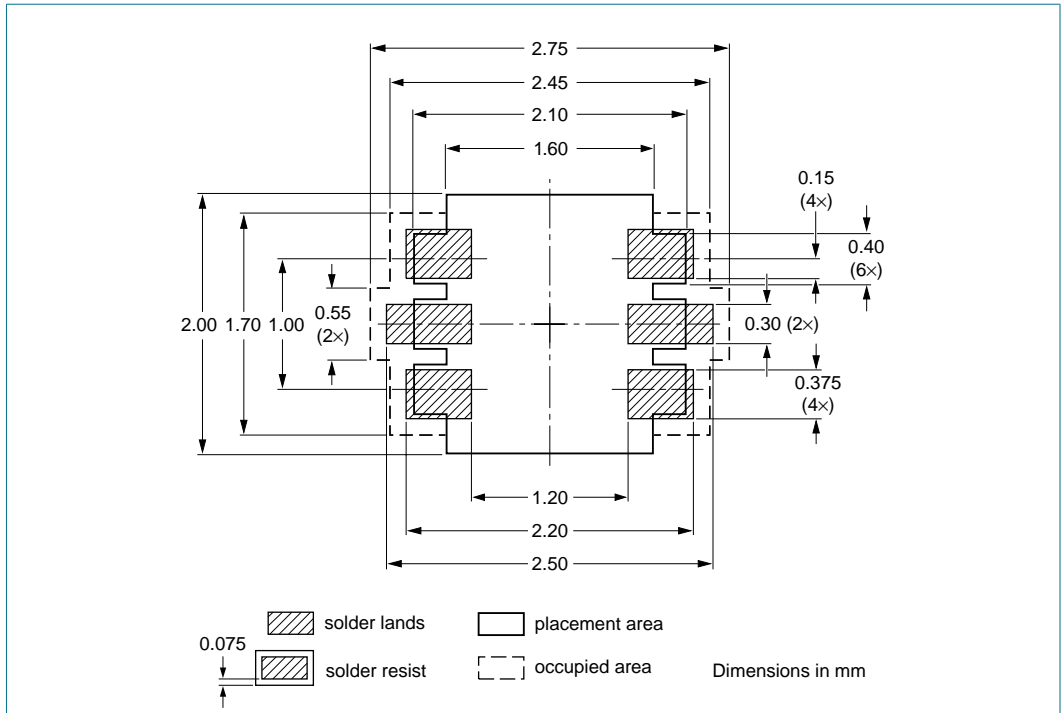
Reflow soldering footprint PESDxL5UV (SOT666)
